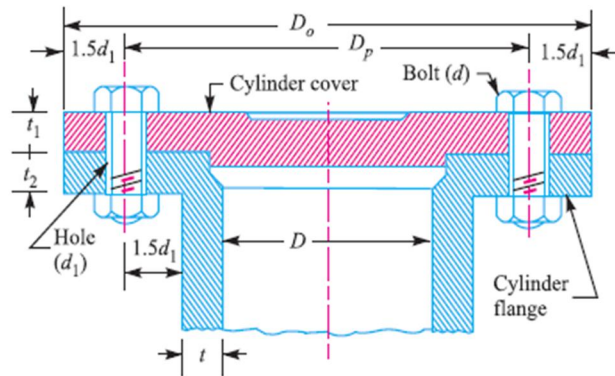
13 Arrangement of securing the cylinder cover with bolts
